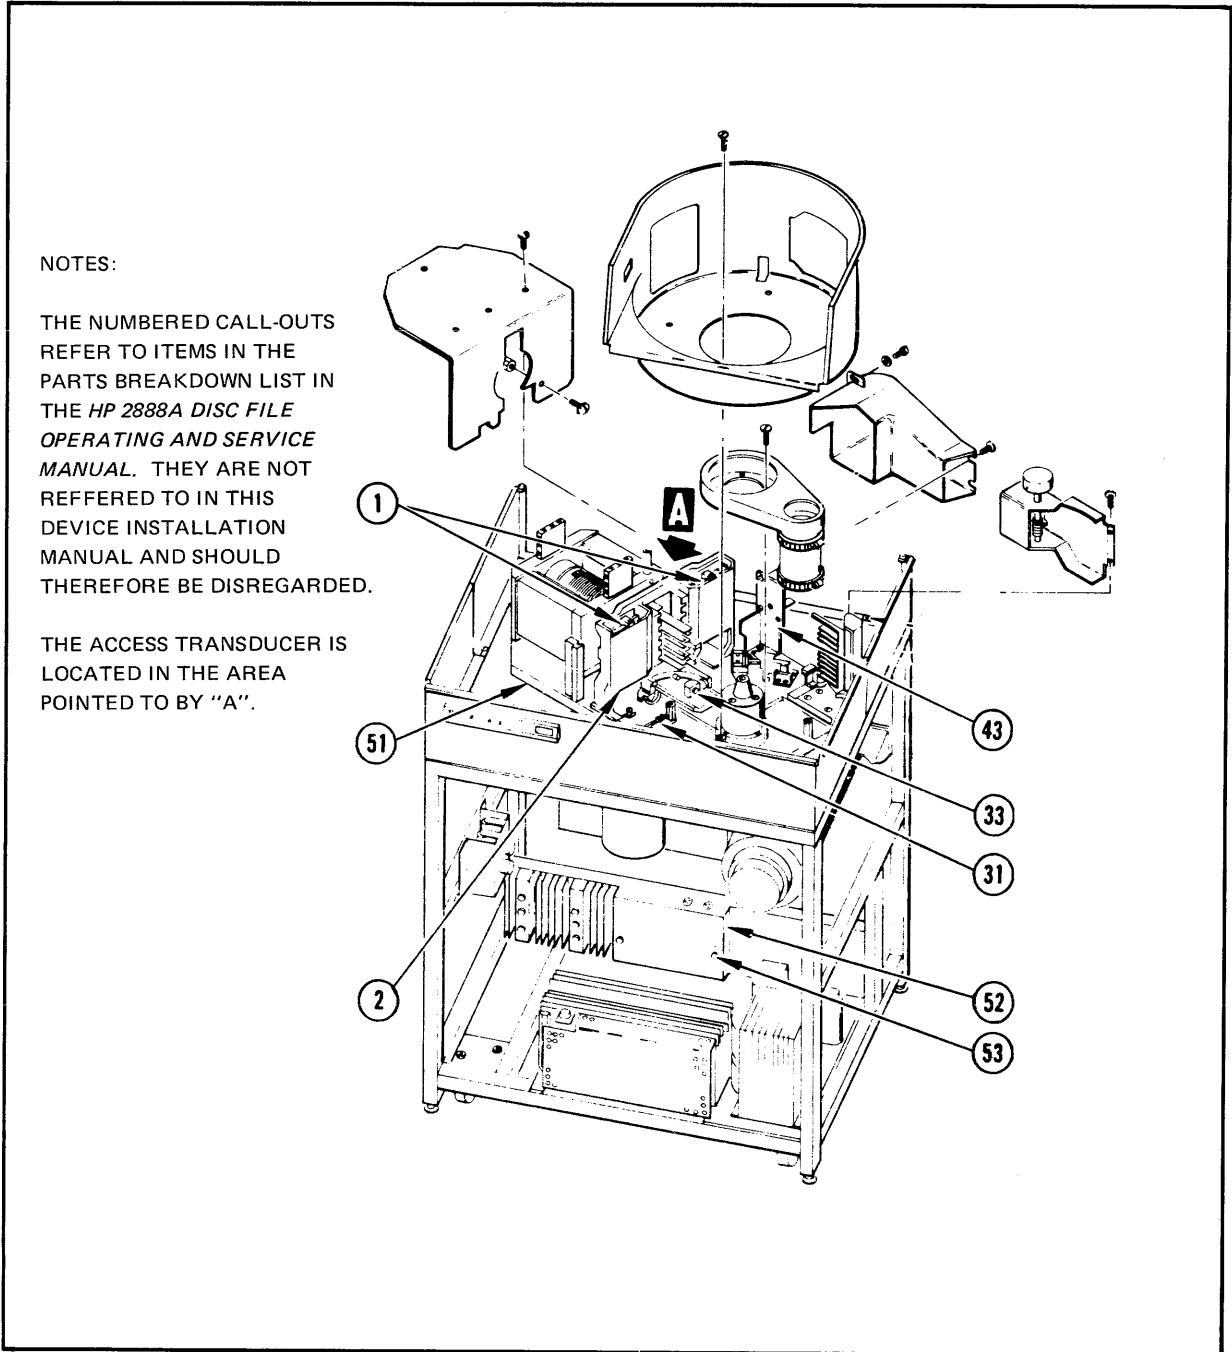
Disc Drive (Front View), Parts Breakdown Diagram
